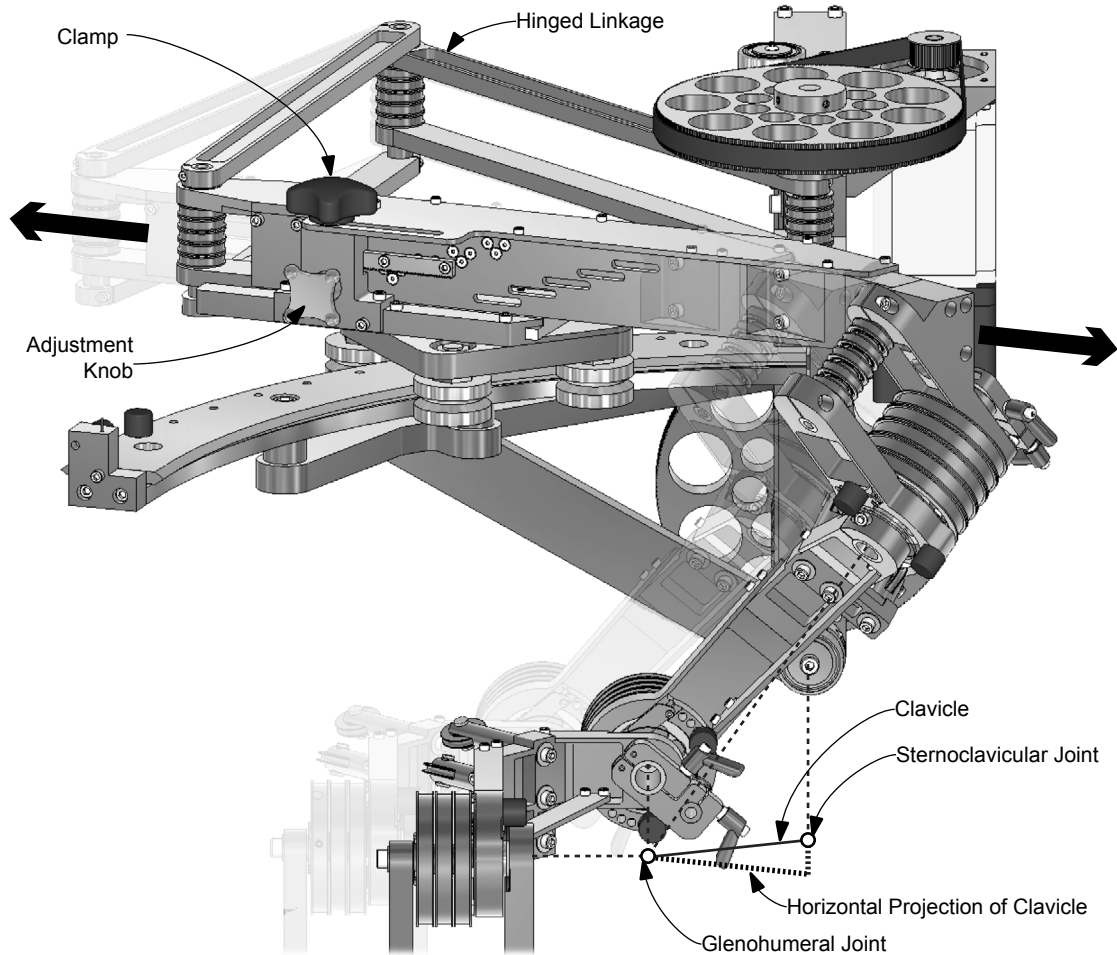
A diagram showing the single linear horizontal adjustment on the shoulder girdle mechanism. The arrows indicate the adjustment direction, which is approximately aligned with the horizontal projection of the clavicle. The mechanism slides as a knob is turned, and is clamped tight with a second knob.
